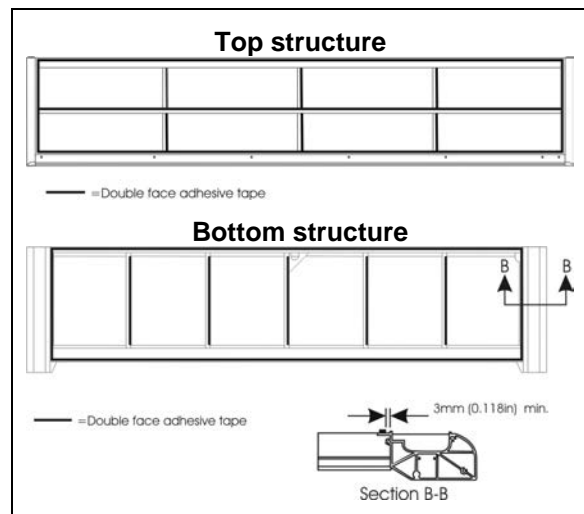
TOP AND BOTTOM PANEL INSTALLATION - DOUBLE FACE ADHESIVE TAPE APPLICATION
